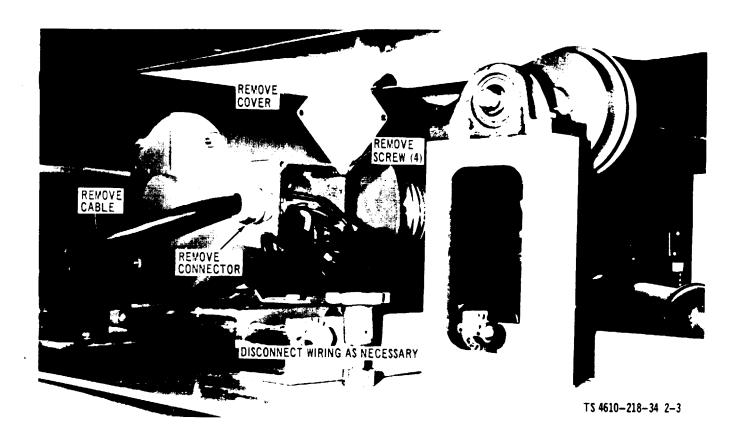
Erdlator Agitator Drive Motor Wiring, Removal and Installation
